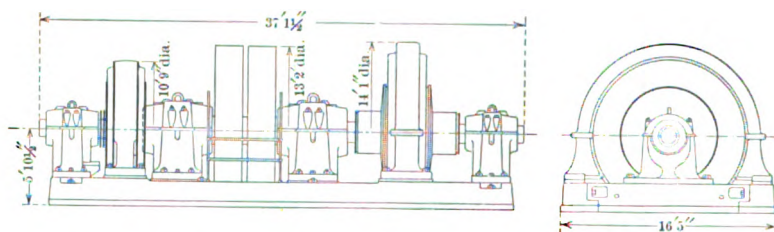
General layout of flywheel motor-generator set supplying power to roll motors
